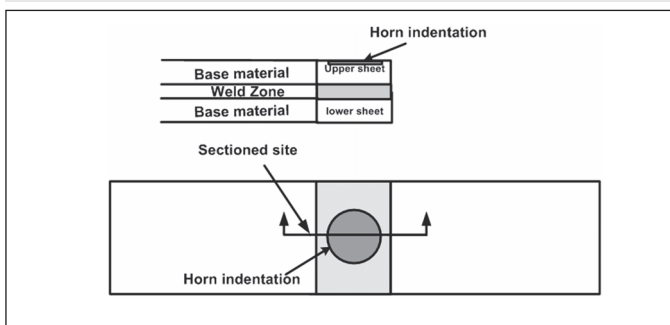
Schematic of sample preparation for examining the microstructure of the ultrasonic welded 4-mm- (0.16-in.-) thick injection molded C_f/PA 66 composite.
